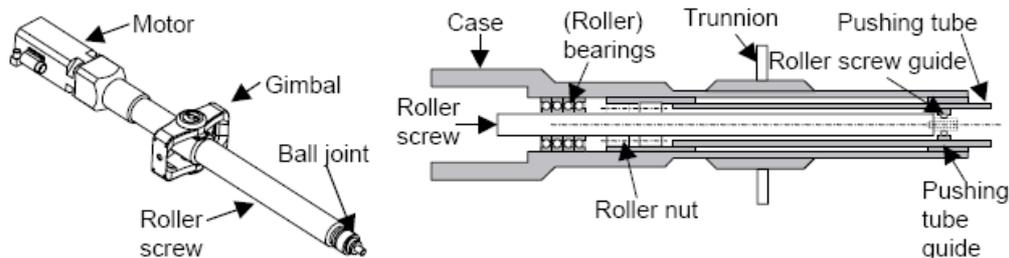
Tricept 805 actuator (left) and roller screw subassembly (right) [8]
